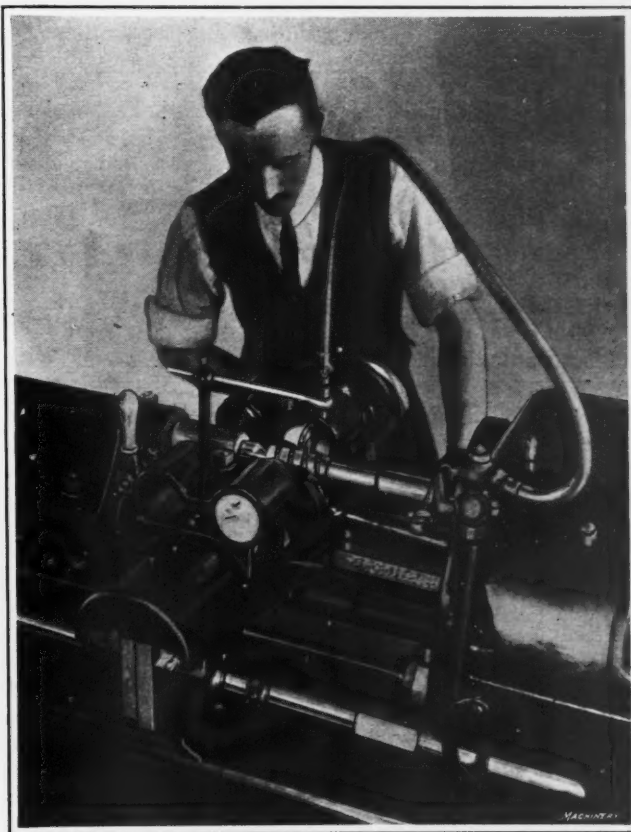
Automatic Threading Lathe cutting Screw Thread
